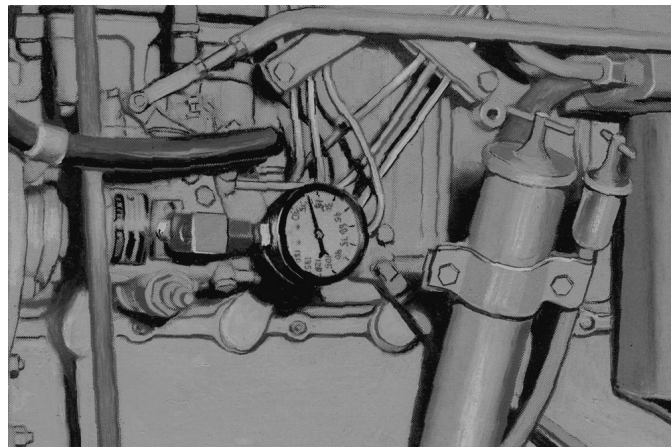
Gauge installed for checking transfer pump pressure.
